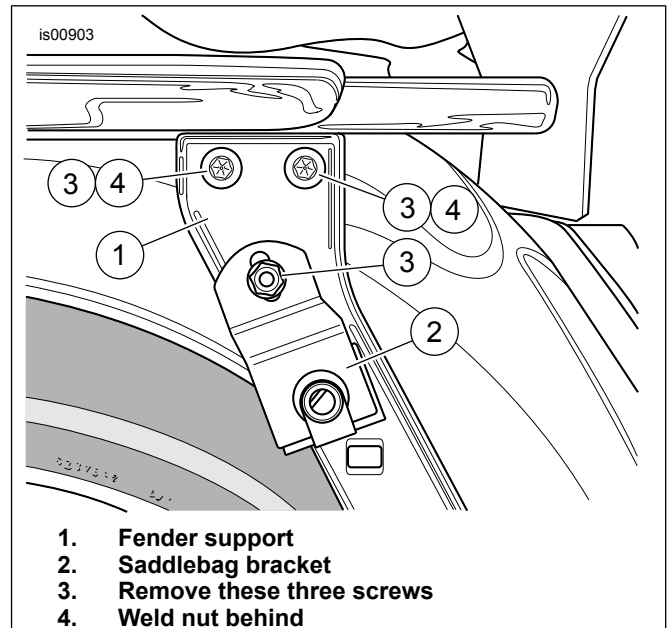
Removal of Original Equipment Screws (Left Side Shown)
